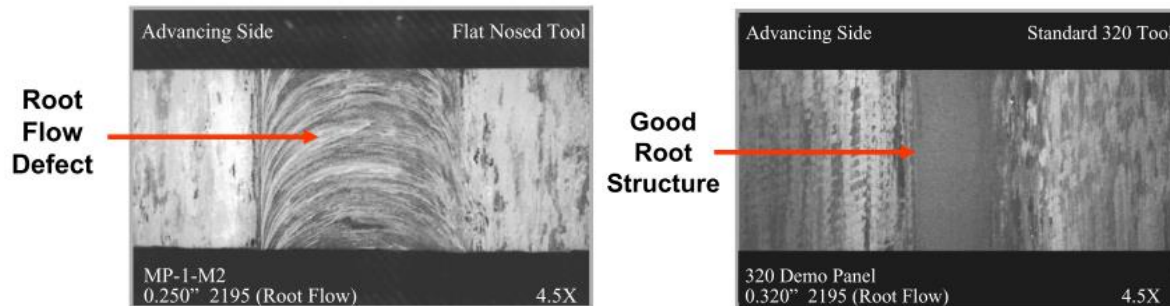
Example of Root defect compared to that of Good Friction Stir Welded Root Structure
